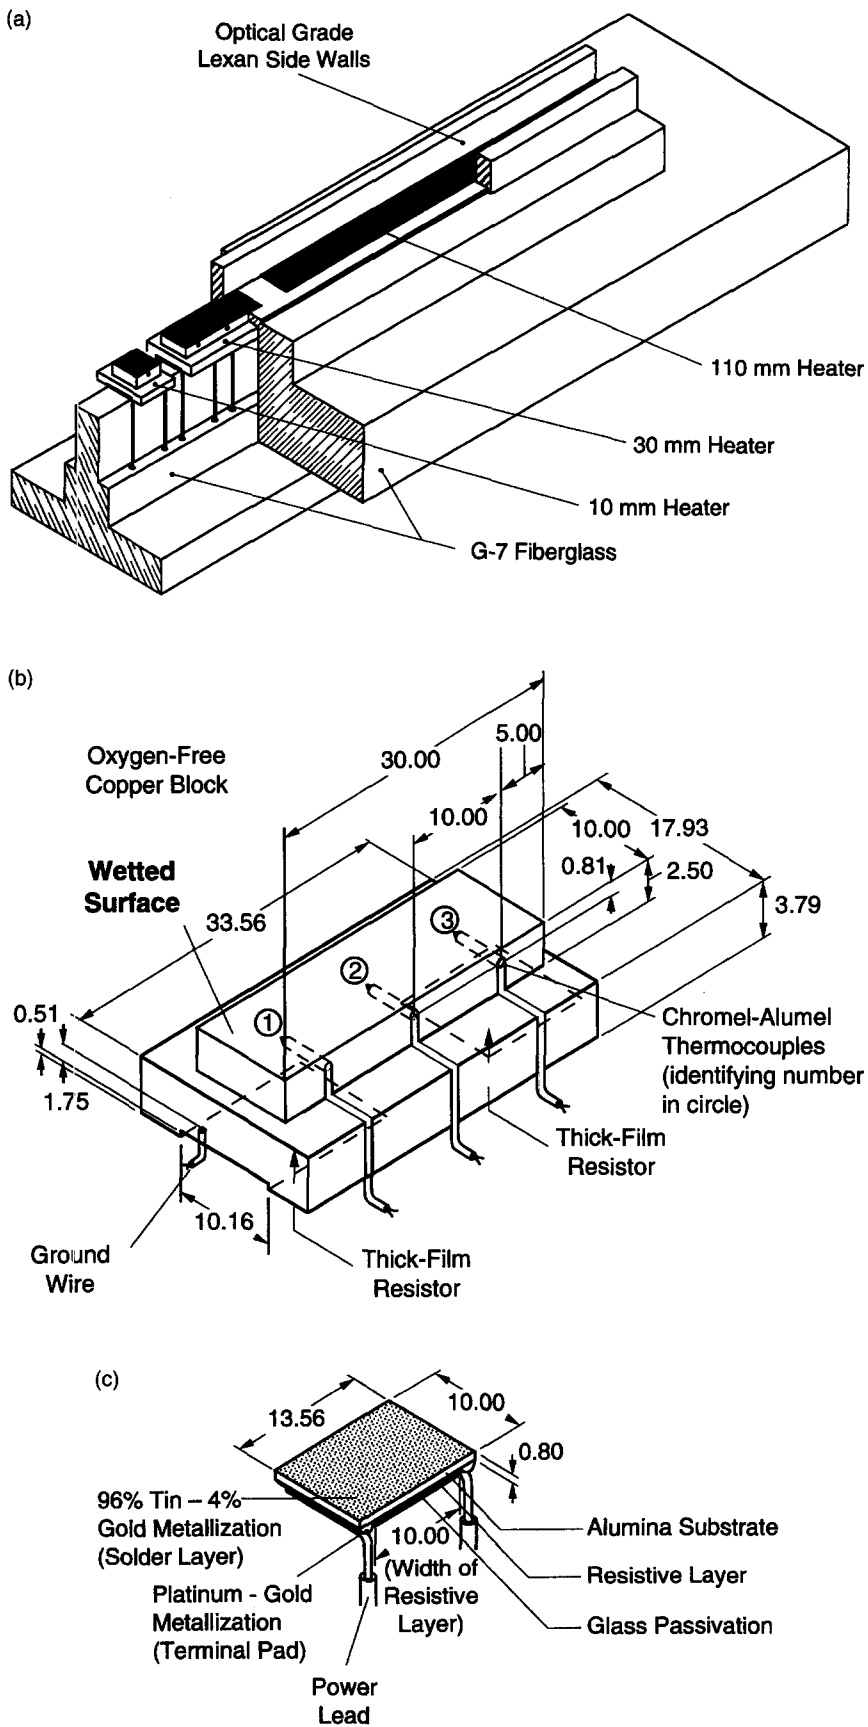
Construction of (a) heater module, (b) 30 mm heater, and (c) thick film resistor.
